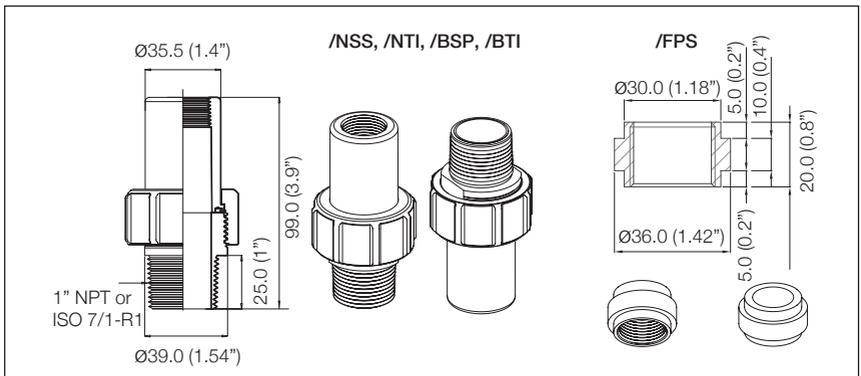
Dimensions 1" FU20 adapter Stainless Steel & Titanium and FU20 adapter for FF40, FS40 and FD40 fittings
